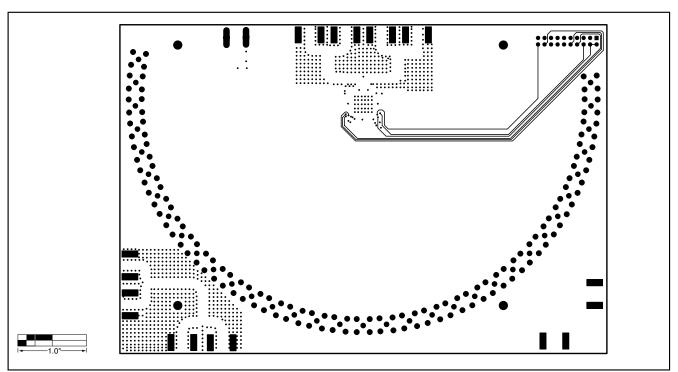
MAX3950 EV Kit PC Board Layout—Solder Side
